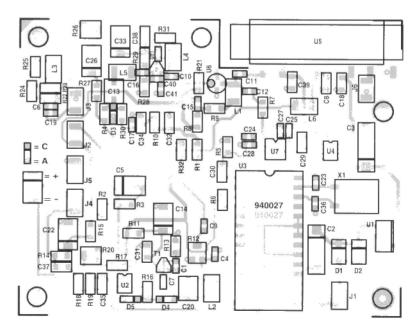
Artwork for the double-sided fibreglass printed circuit board designed for the transmitter.
